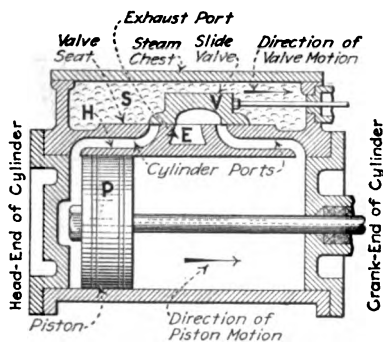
Point of head-end admission—steam about to enter the head end of the cylinder.
